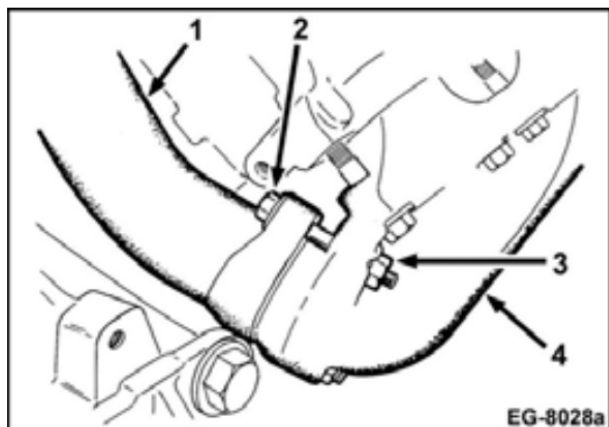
Removing Right Exhaust Tube Mounting Hardware at Exhaust Manifold
